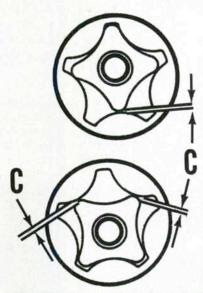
Measure inner to outer rotor clearance (C) as shown; renew rotors if clearance exceeds 0.006 inch (0.15 mm).
